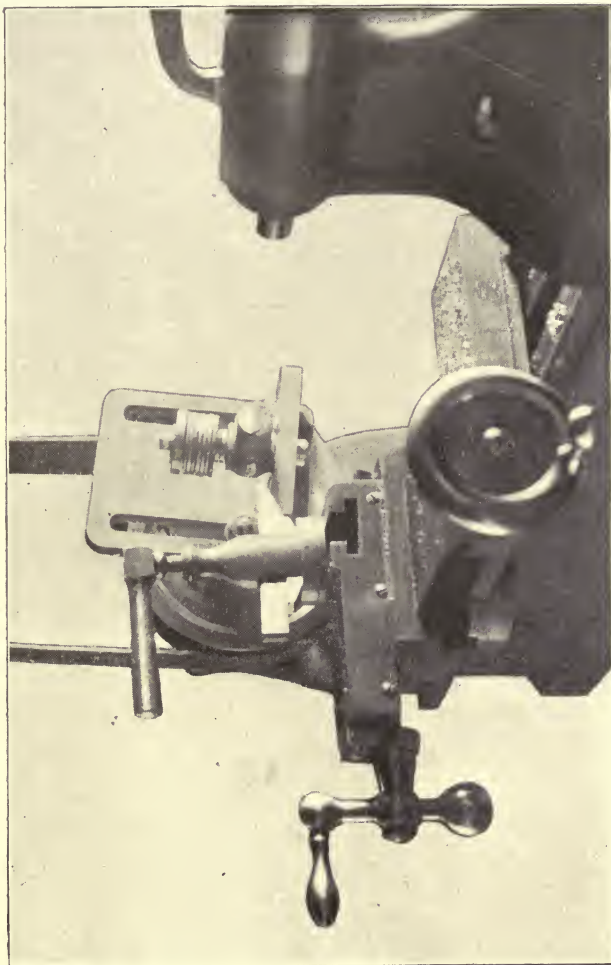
PISTON END OF CONNECTING ROD IN POSITION FOR BORING TO FIT ROD.
